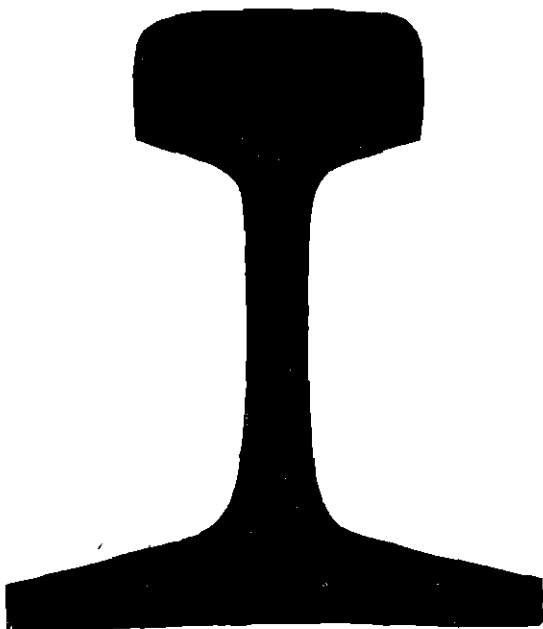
Sulphur print of 125 pound rail which displayed a transverse fissure. Print taken on cross section of rail immediately adjacent to the transverse fissure.
